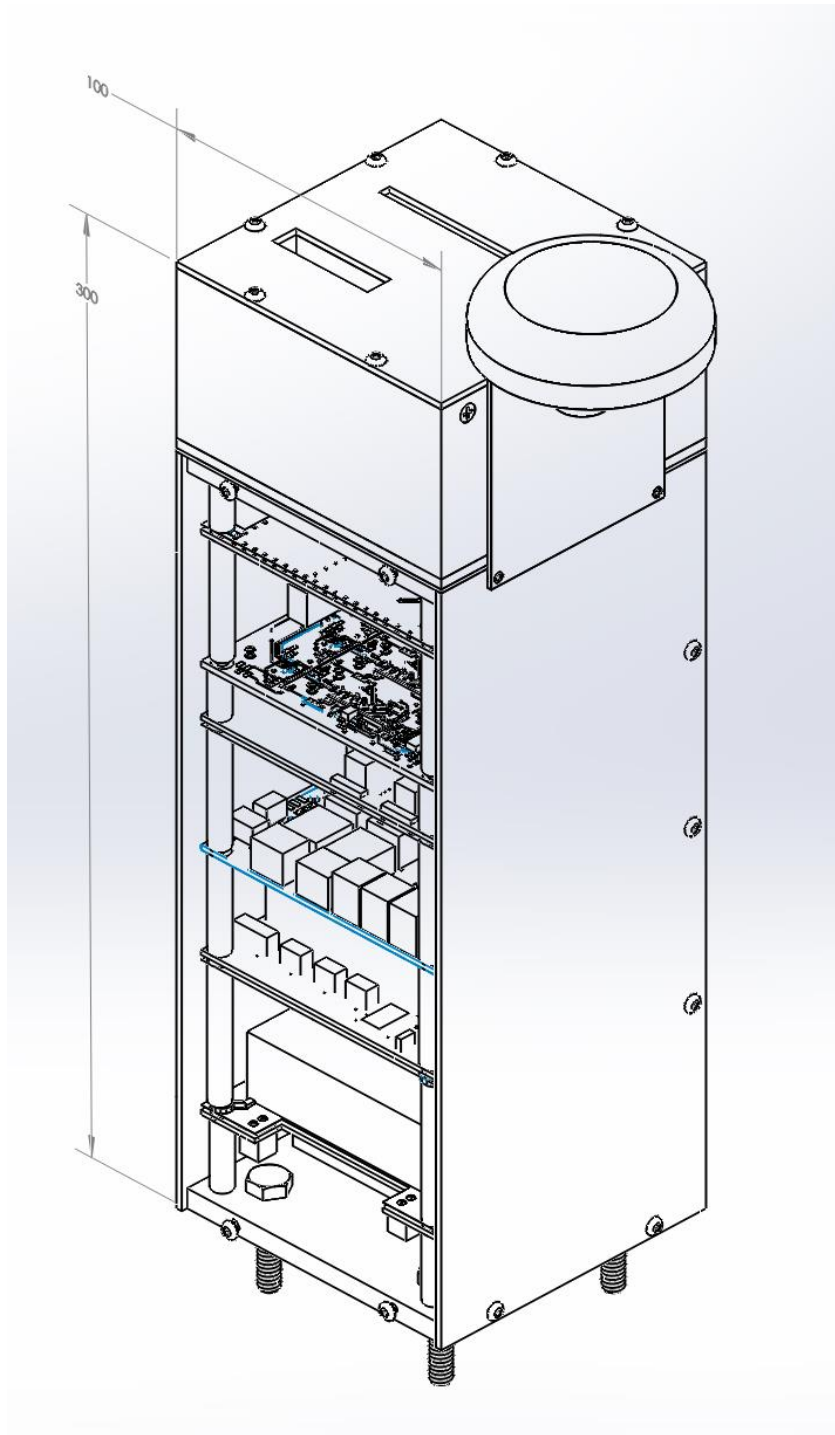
The previous mechanical drawing depicts the final payload assembly with the GPS antenna mount included.
